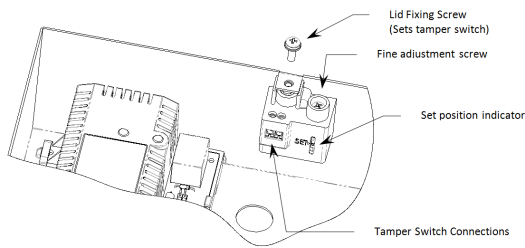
Position of tamper assembly in 'hinged lid' style enclosure
